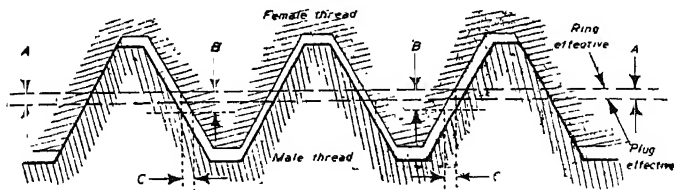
Enlarged view of scrap section assembly of male and female U.S.S. thread form with pitch error.
